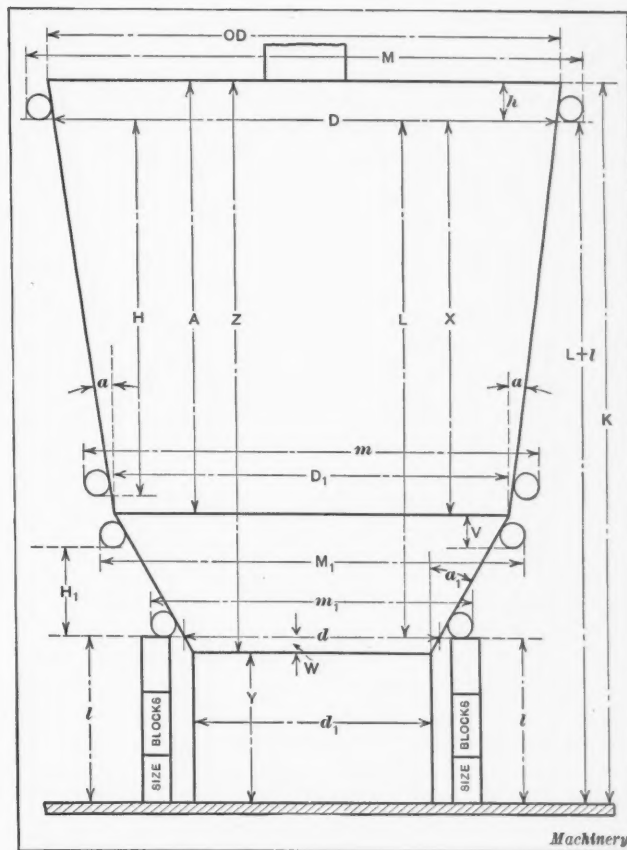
Method of taking Measurements when inspecting a Double Tapered Chamber Check
